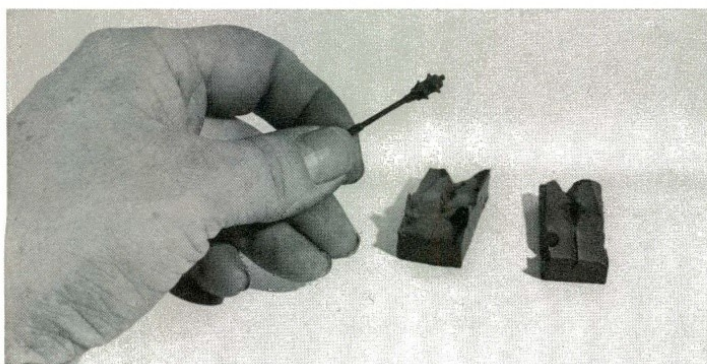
Casting pigmented resin over the end of a fiber can produce complex illuminated shapes.
